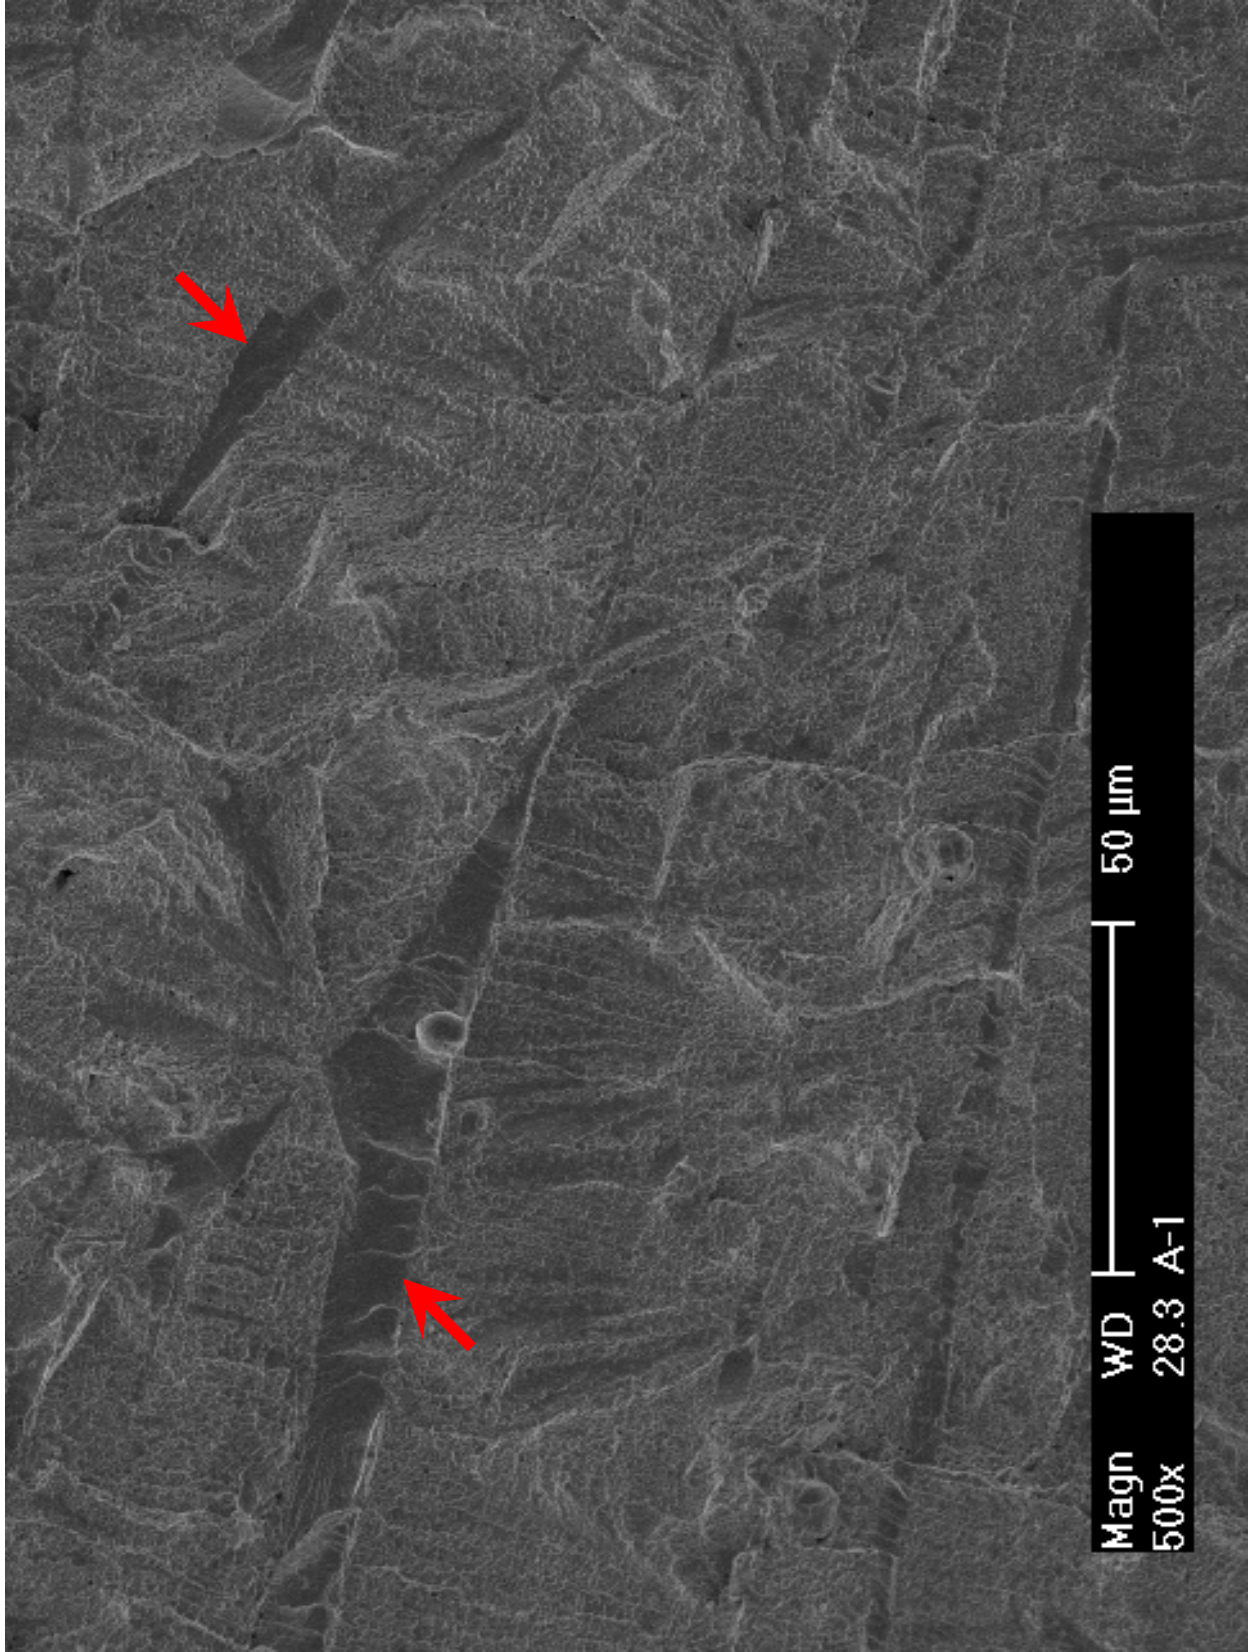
Fracture surface of specimen A-1 showing that delta ferrite deformed to a lesser extent than austenite. Crack propagation from bottom to top.
